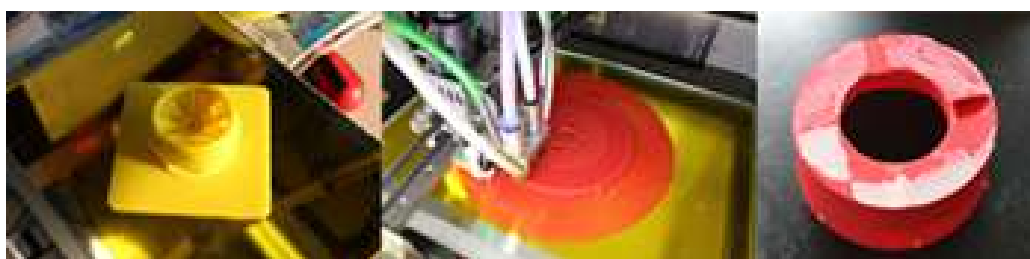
The 3d printing of the hydraulic parts of Pump-Jet Module.
